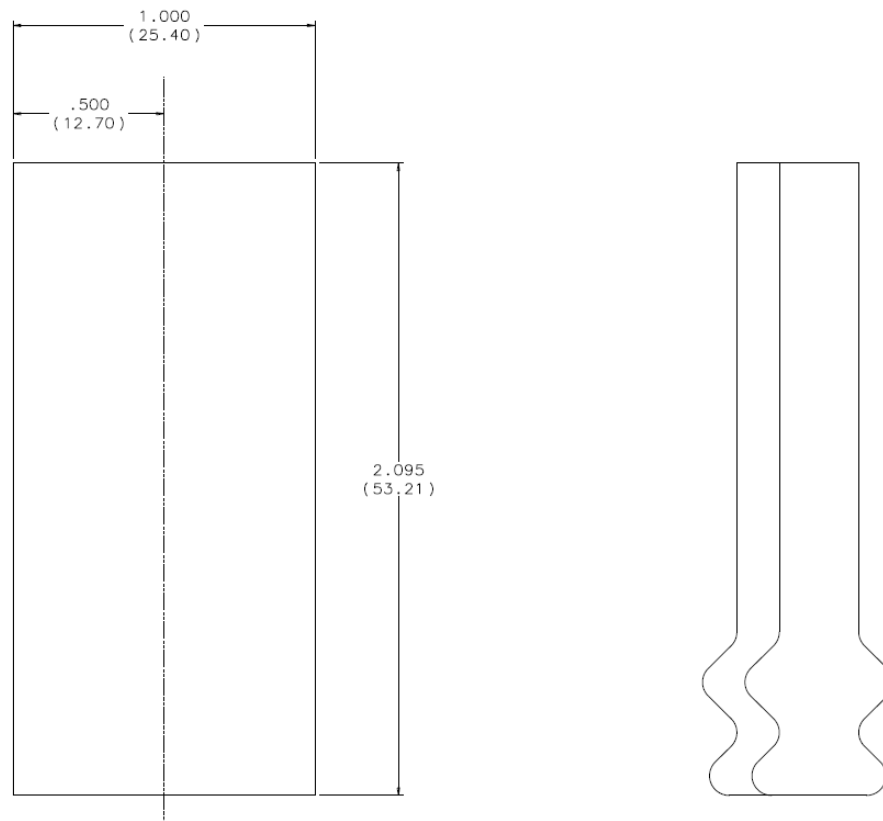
Test Case Geometry Definition: Axisymmetric View of Blade Showing Height and Width in Inches and (Millimeters)
